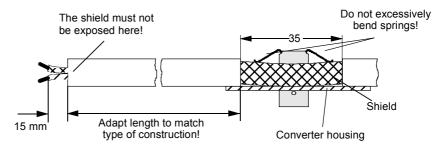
Removing insulation from the cable when shield clamps are used
